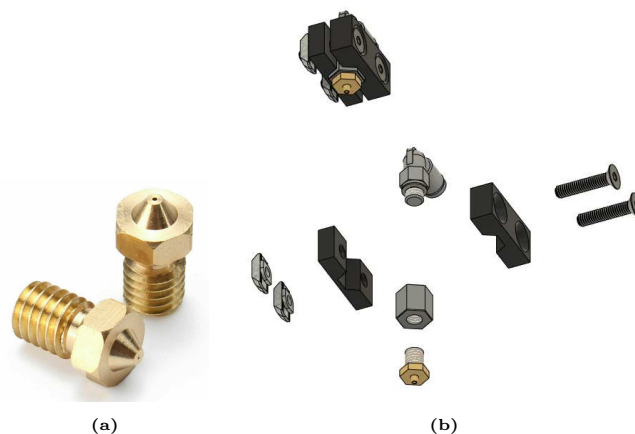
(a) $\phi 1$ mm nozzle and (b) CAD model of a nozzle assembly with exploded view.
